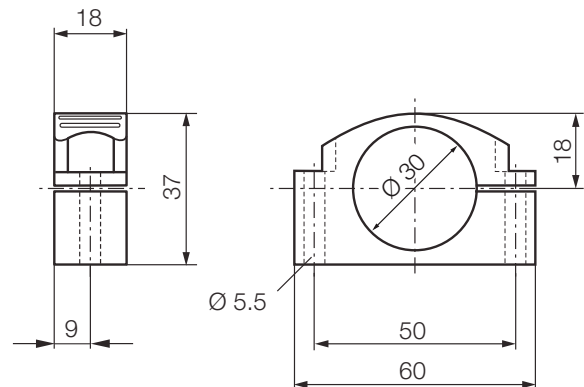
Mounting cuff BTL6-A-MF03-K-50
